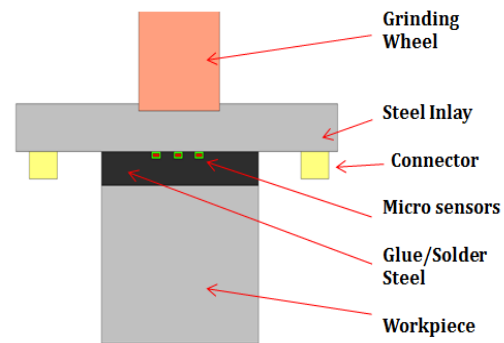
Cross-sectional view of the complete sensor-integrated workpiece
